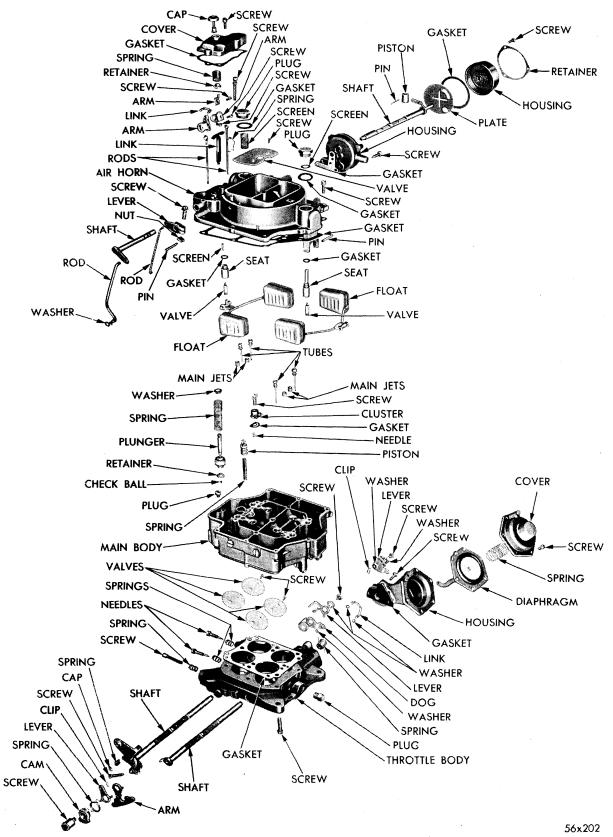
Carburetor Assembly (WCFB 2314 or 2367 SA)
